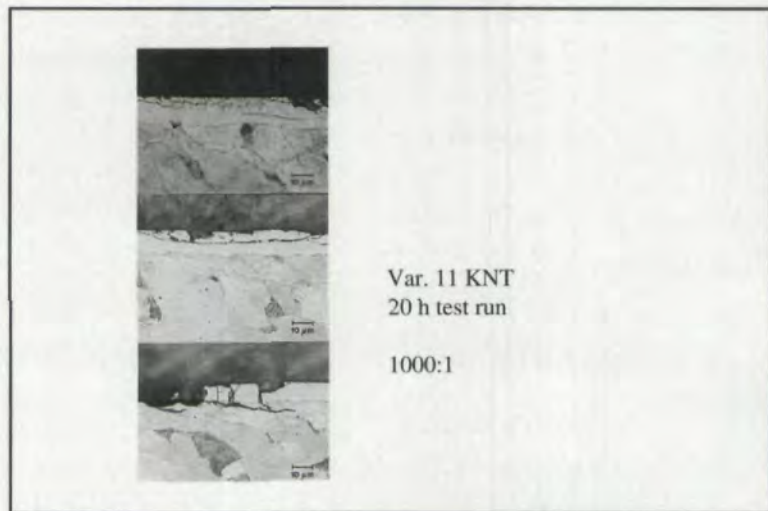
Helical gear after test run. Cross section of wearing zone.
